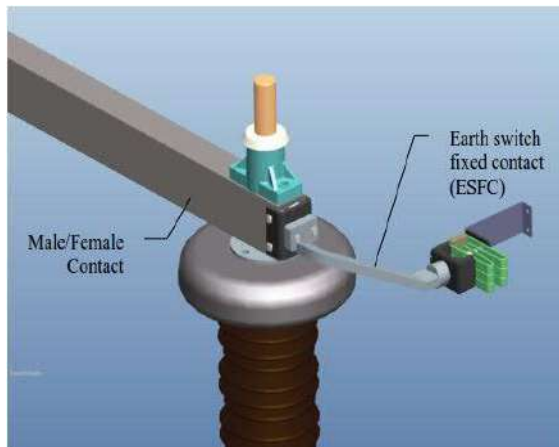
Earth switch fixed contact (Type – "A" Design)
